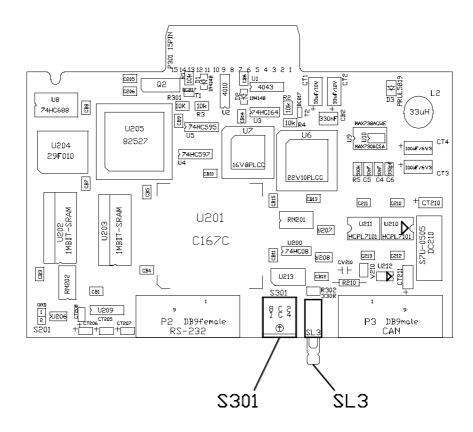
Position of configuration elements on the component layer of the PCB
